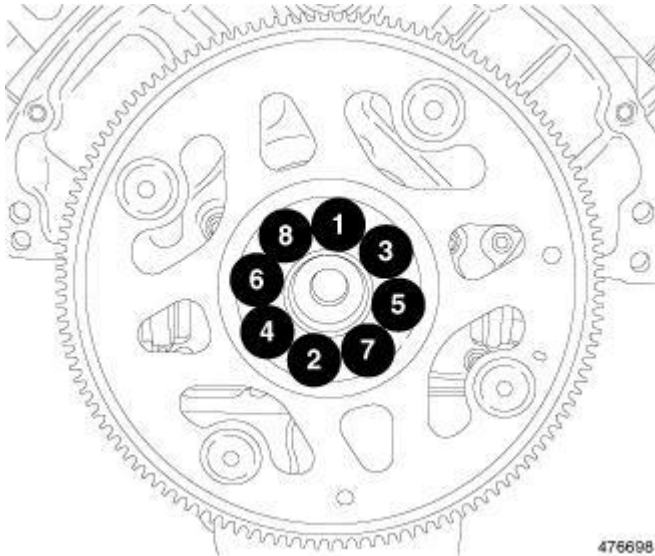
Flexplate Retaining Bolt Removal & Tightening Sequence
